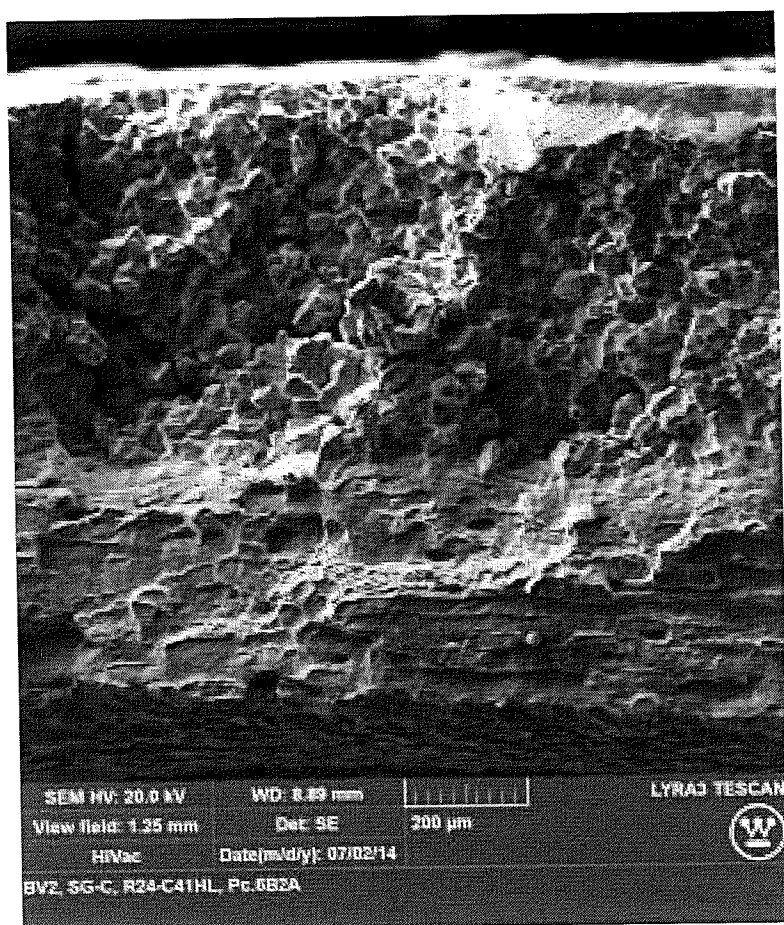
Example of R24C41-6B Burst Opening Fracture Surface
